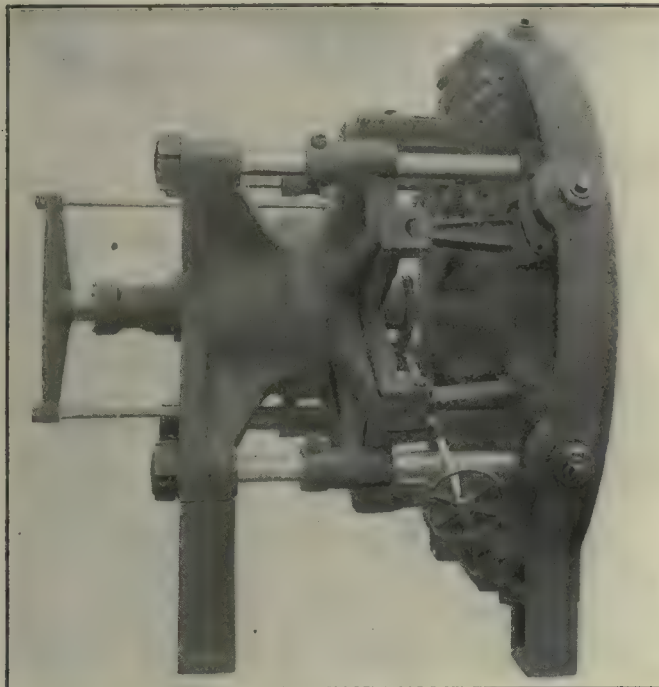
HYDRAULIC WHEEL-RIM SHRINKER
